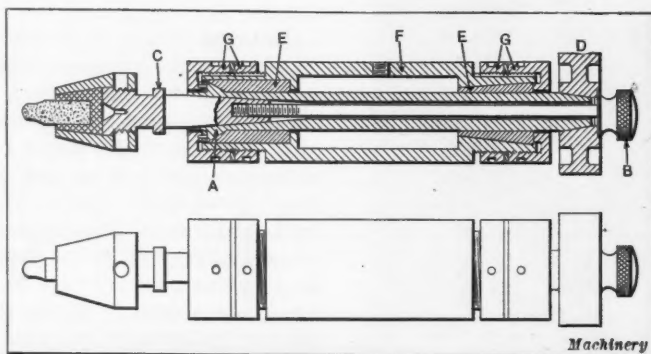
Design of Grinding Spindle which is Interchangeable between Grinding Machine and Truing Machine
